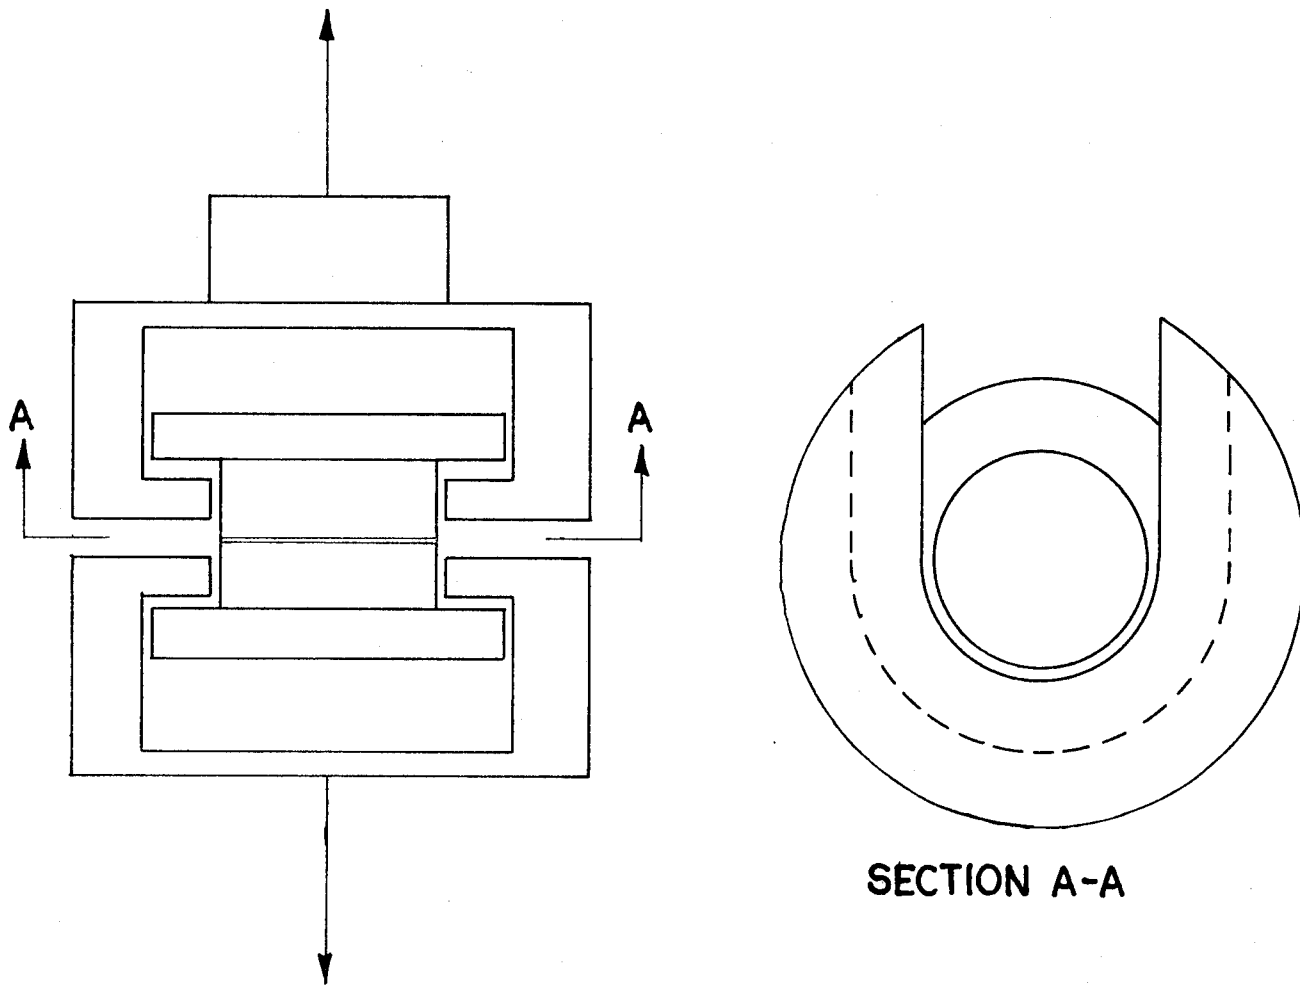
ASTM D 897 TENSILE SPECIMEN
